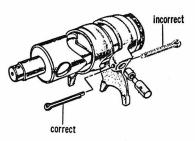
Exploded view of four speed gear shift assembly. Cotter pins in guide pins (4) should be installed from middle of shifter assembly outward,
